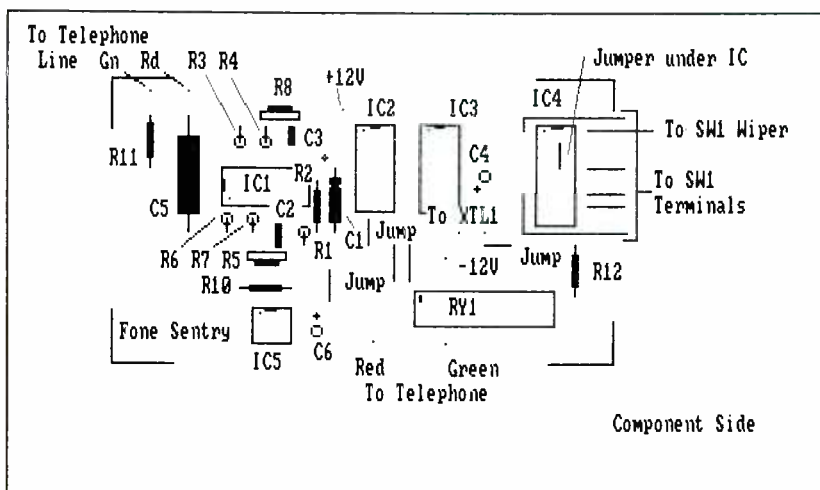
Wiring guide for printed-circuit board. Use this as a rough guide to component layout when assembling project on perforated board.
